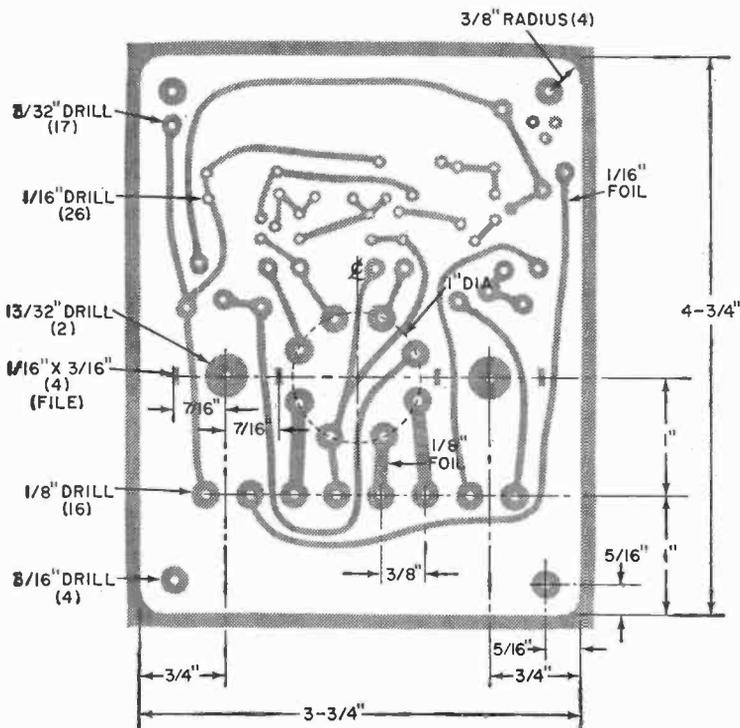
A printed circuit board can be etched following the outlines shown in this drawing. Use of this outline should be predicated on the physical size of capacitor C1, location of the terminals for the octal socket to hold K1, and whether or not the builder uses twist-tab potentiometers for R11 and R12. Point-to-point wiring can be used in place of a printed circuit without encountering any problems.
